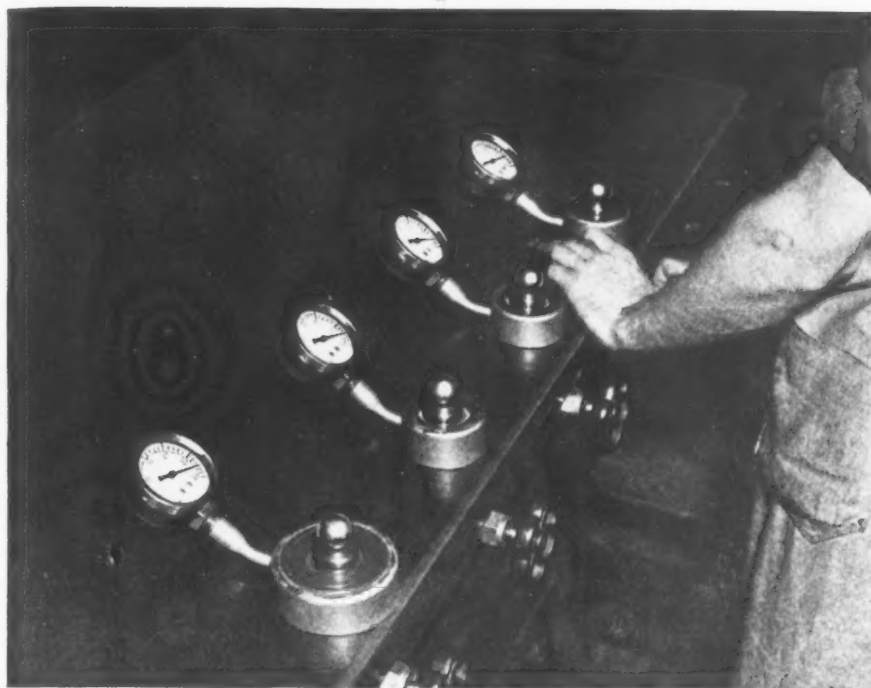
Inspection Bench where Each Valve Seat and Its Mating Ball are Checked for Closeness of Fit by the Use of Vacuum
